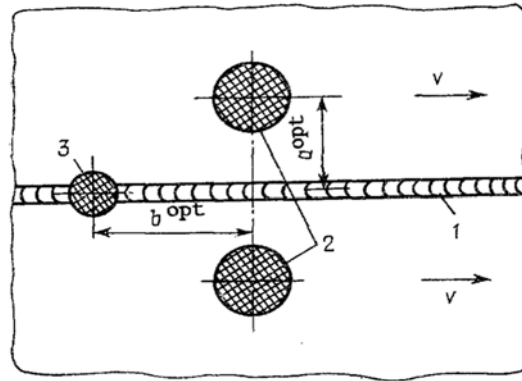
Diagram showing local pre-heating of welded seams of the plates: (1) welded seam; (2) heating zone; (3) cooling zone[107]
